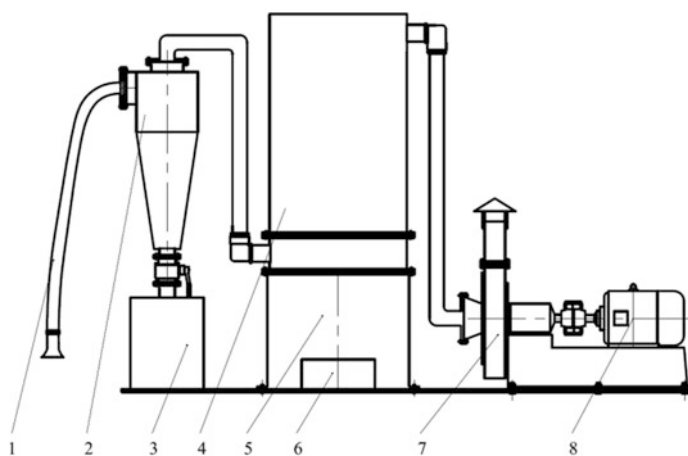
Overall diagram of abrasive blocks pumping device. 1—Inlet; 2—cyclone separator; 3—storage tank; 4—bag filter; 5—ash bucket; 6—ash storage box; 7—centrifugal fan; 8—motor
